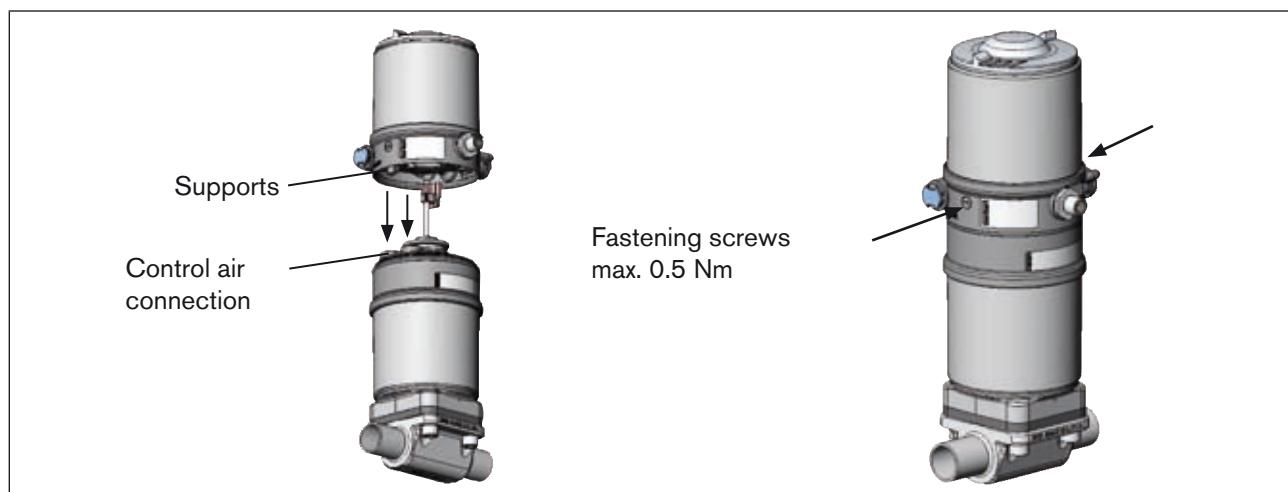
Installation of positioner, series 2103, 2300 and 2301
